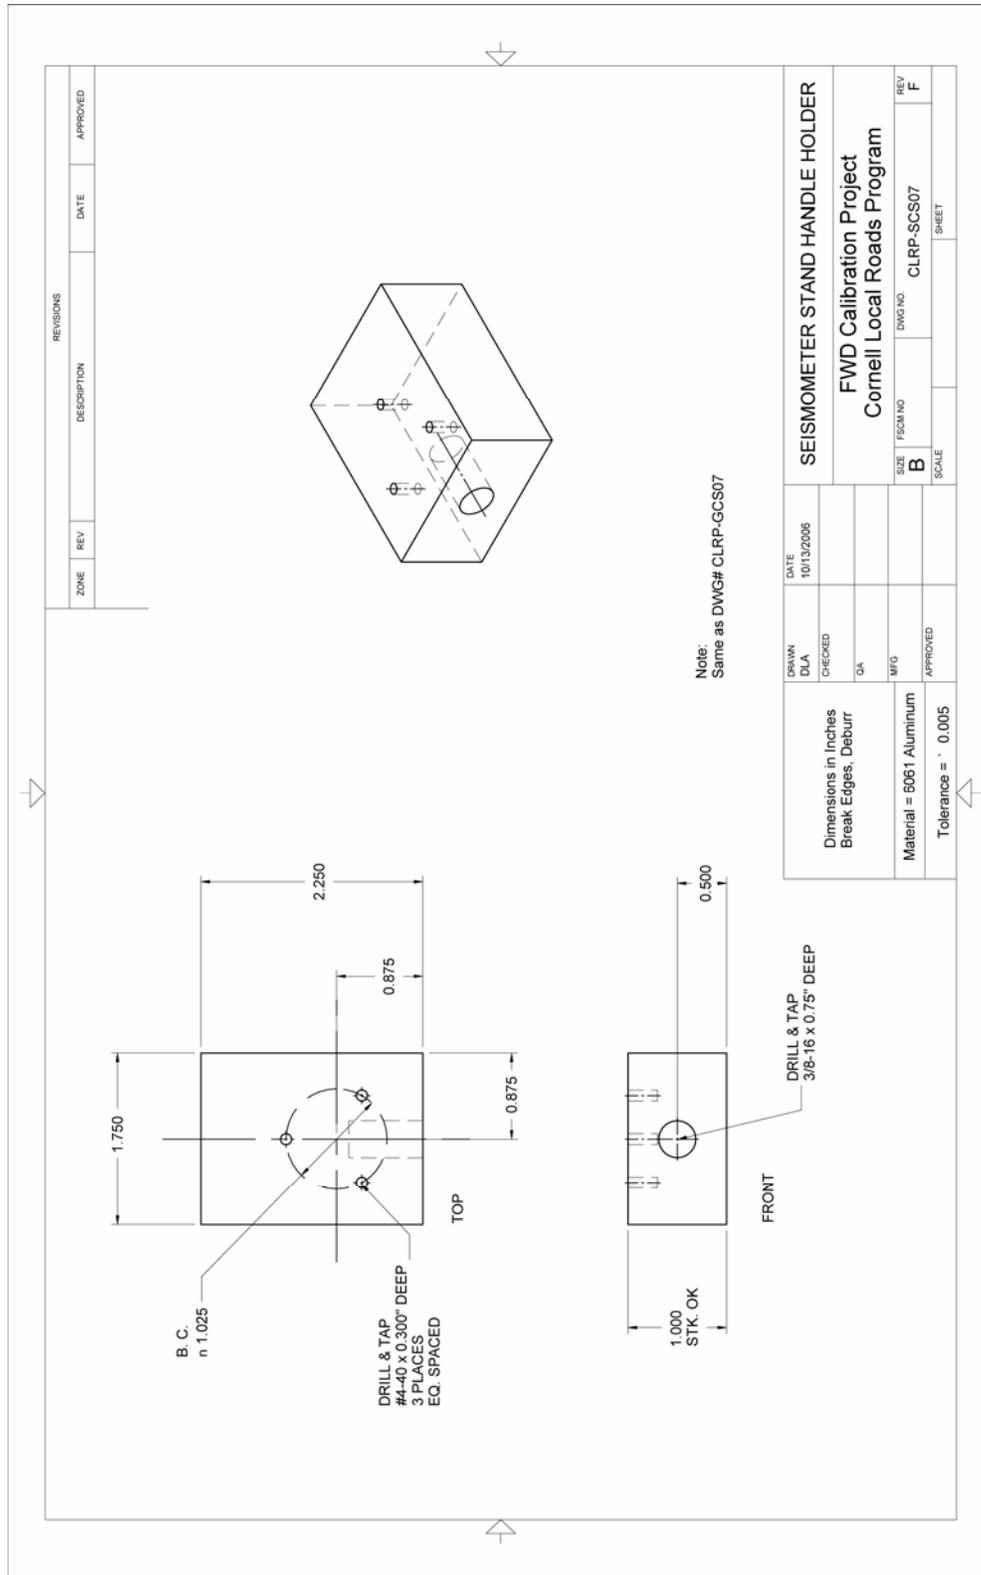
Drawing. CLRP-SCS07 Seismometer Stand Handle Holder.
